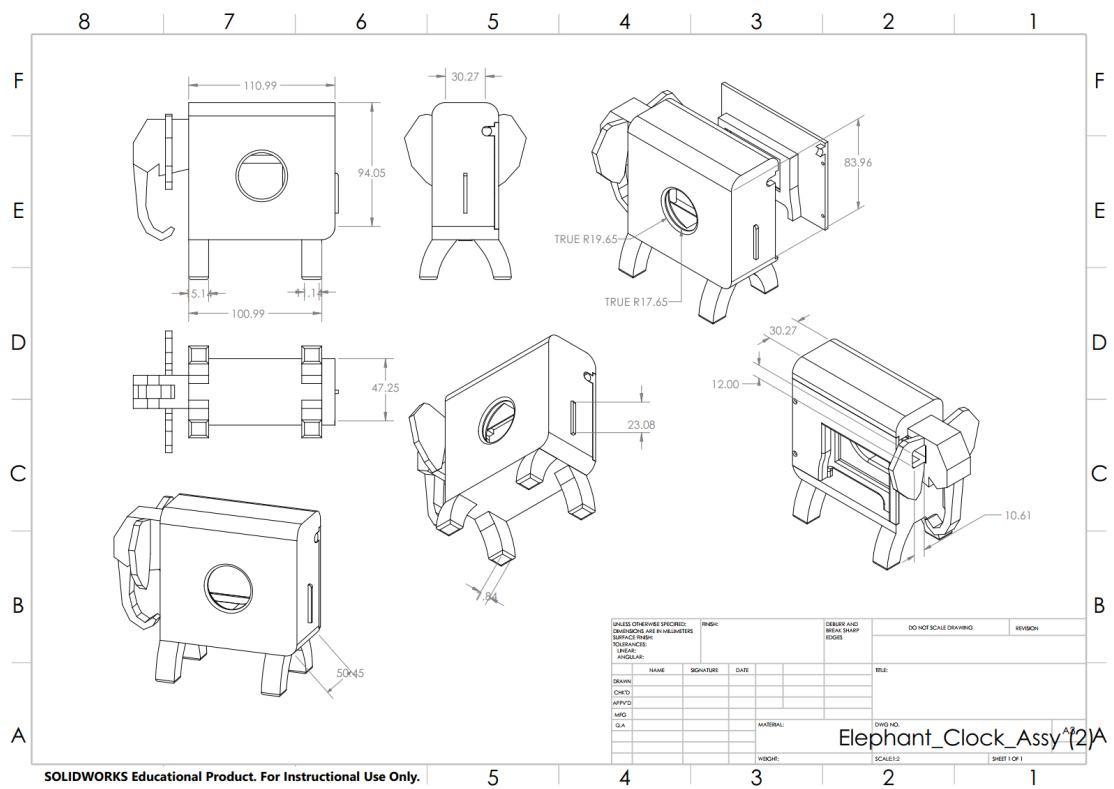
2D technical drawing of the enclosure with dimensions (in mm), multiple views, and assembly projections created in SolidWorks.
